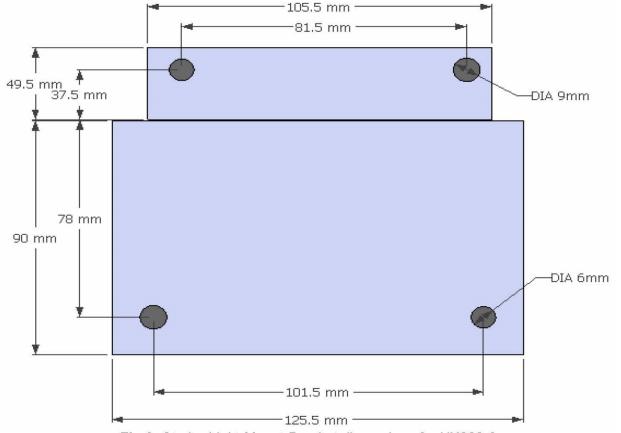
Strobe Light Mount Bracket dimensions for KX080-3
